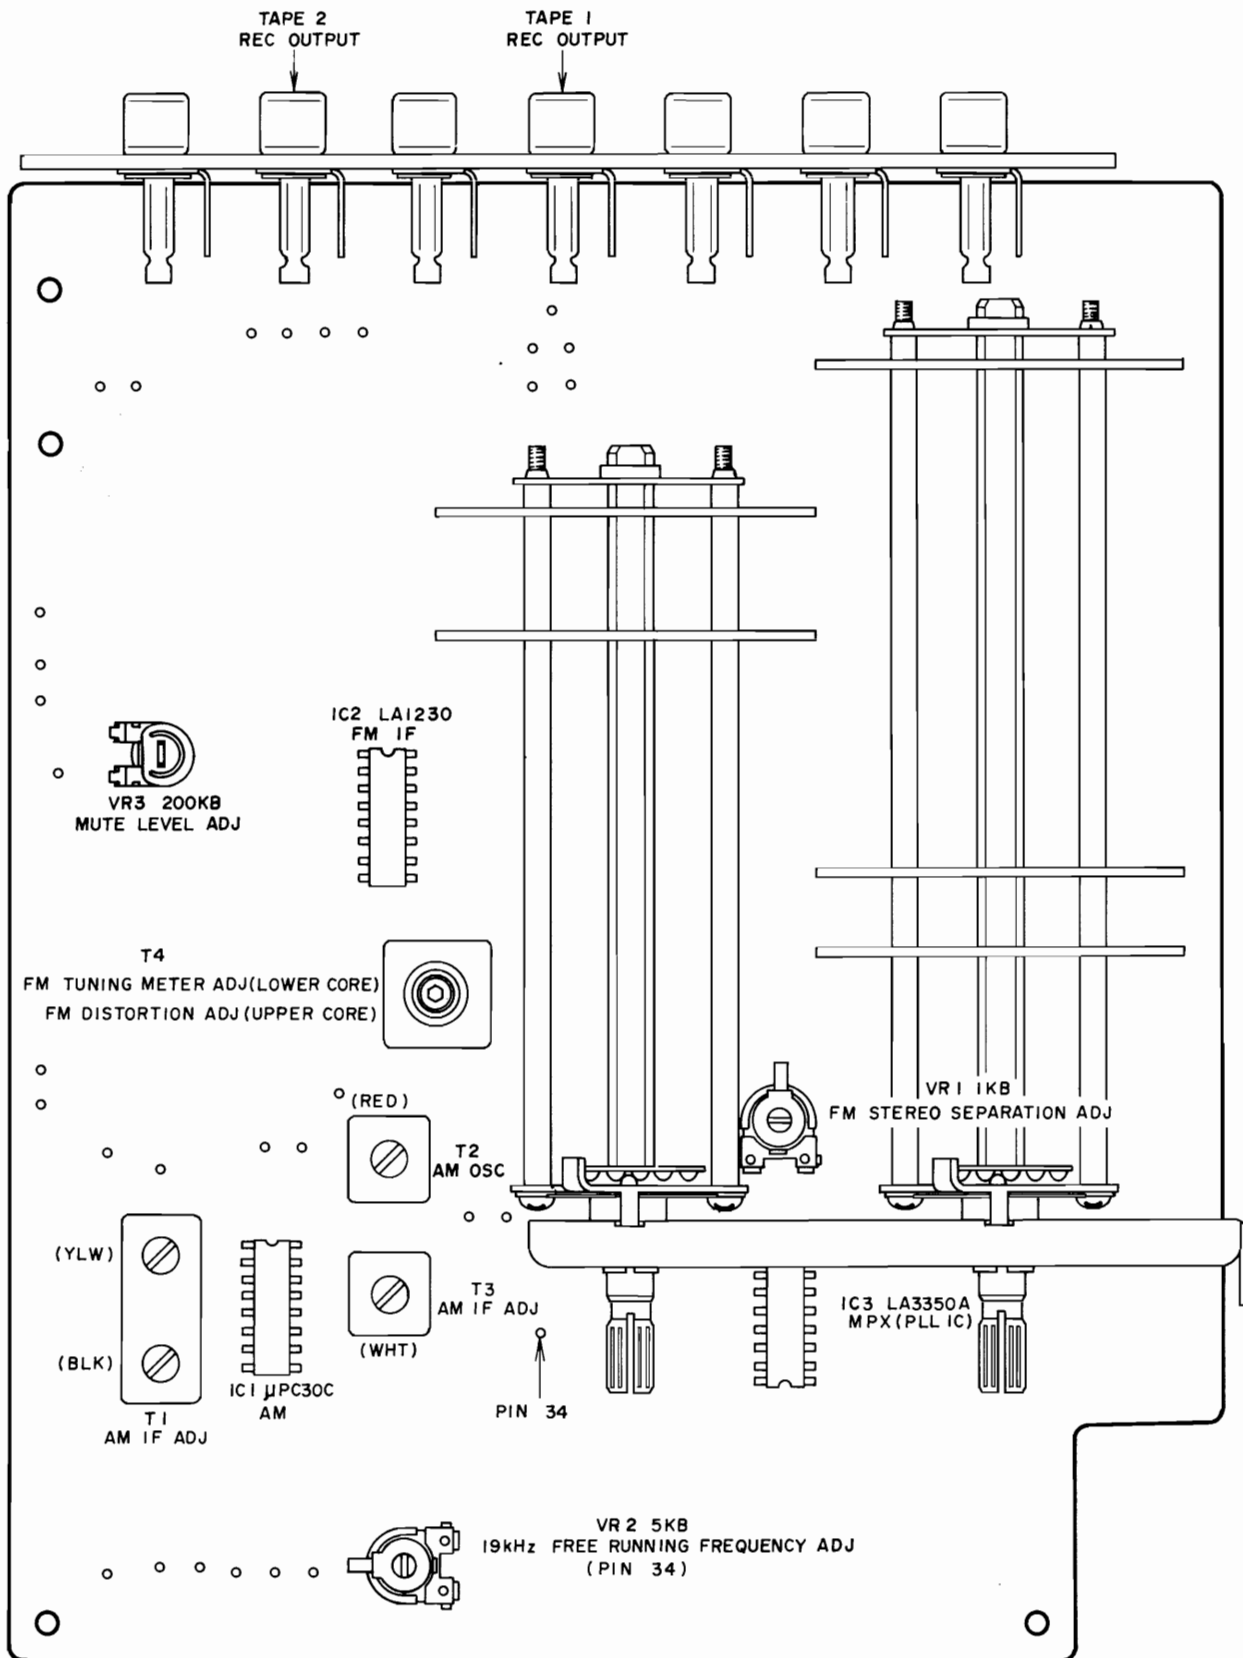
MFC P.C Board AA-5270A (AA-1020)
